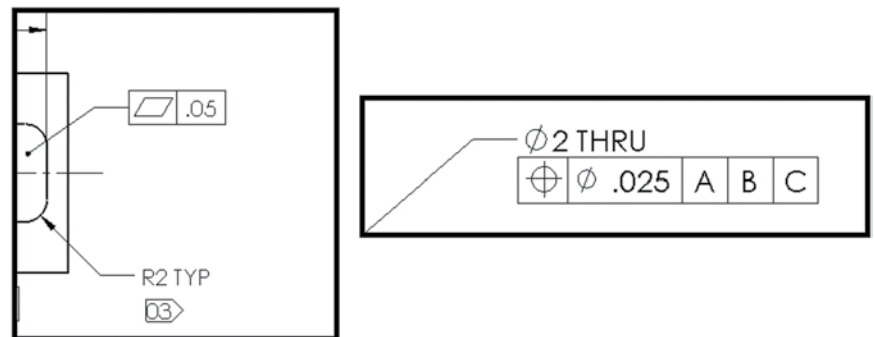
Sample images from an engineering drawing using GD&T symbols.
